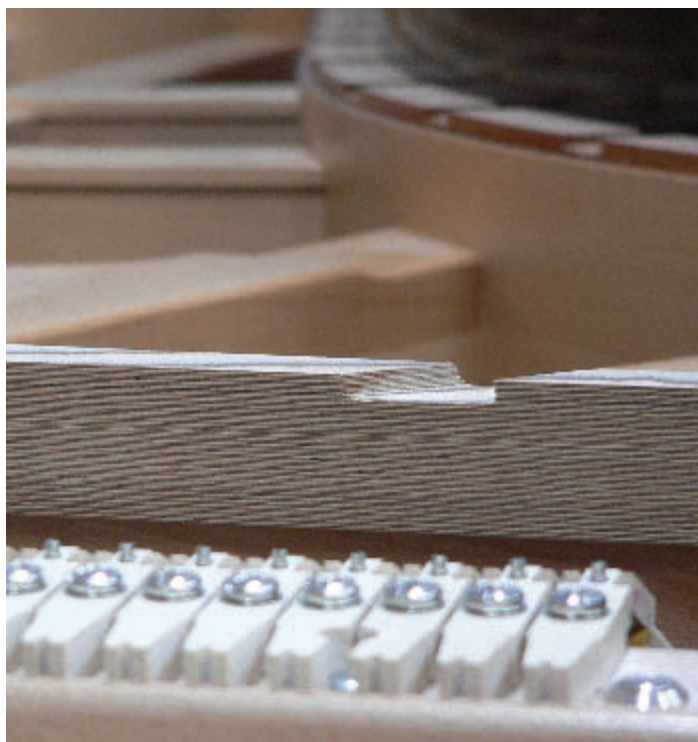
Front view of the 275 belly rail. Note the horizontal beech laminations, similar to Falconwood pinblock material.
